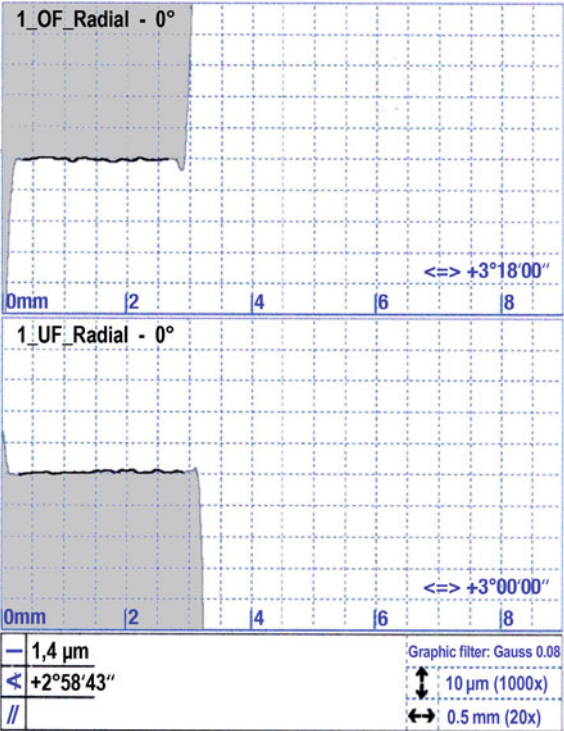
shows the shape record of the 1st piston ring shown above, after its use in an engine. A clear wear zone has formed on the bottom side of the piston ring, on the side facing the running surface of the cylinder liner. The depth of this burial is typically in the range of a few microns.
